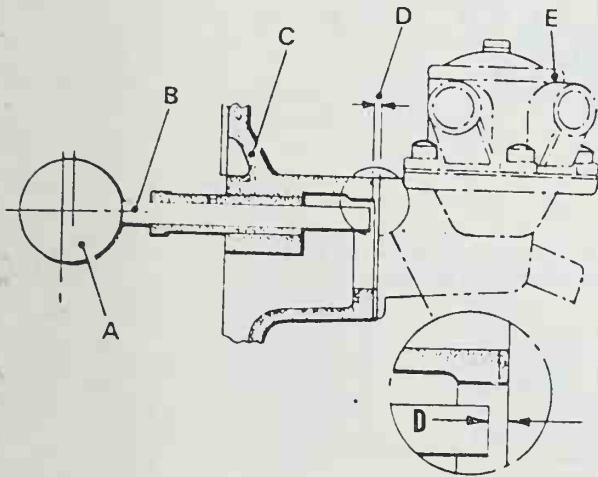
Cross-sectional view of lift pump used on ST engines. Push rod clearance (D) is 1/32 to 3/64-inch.
